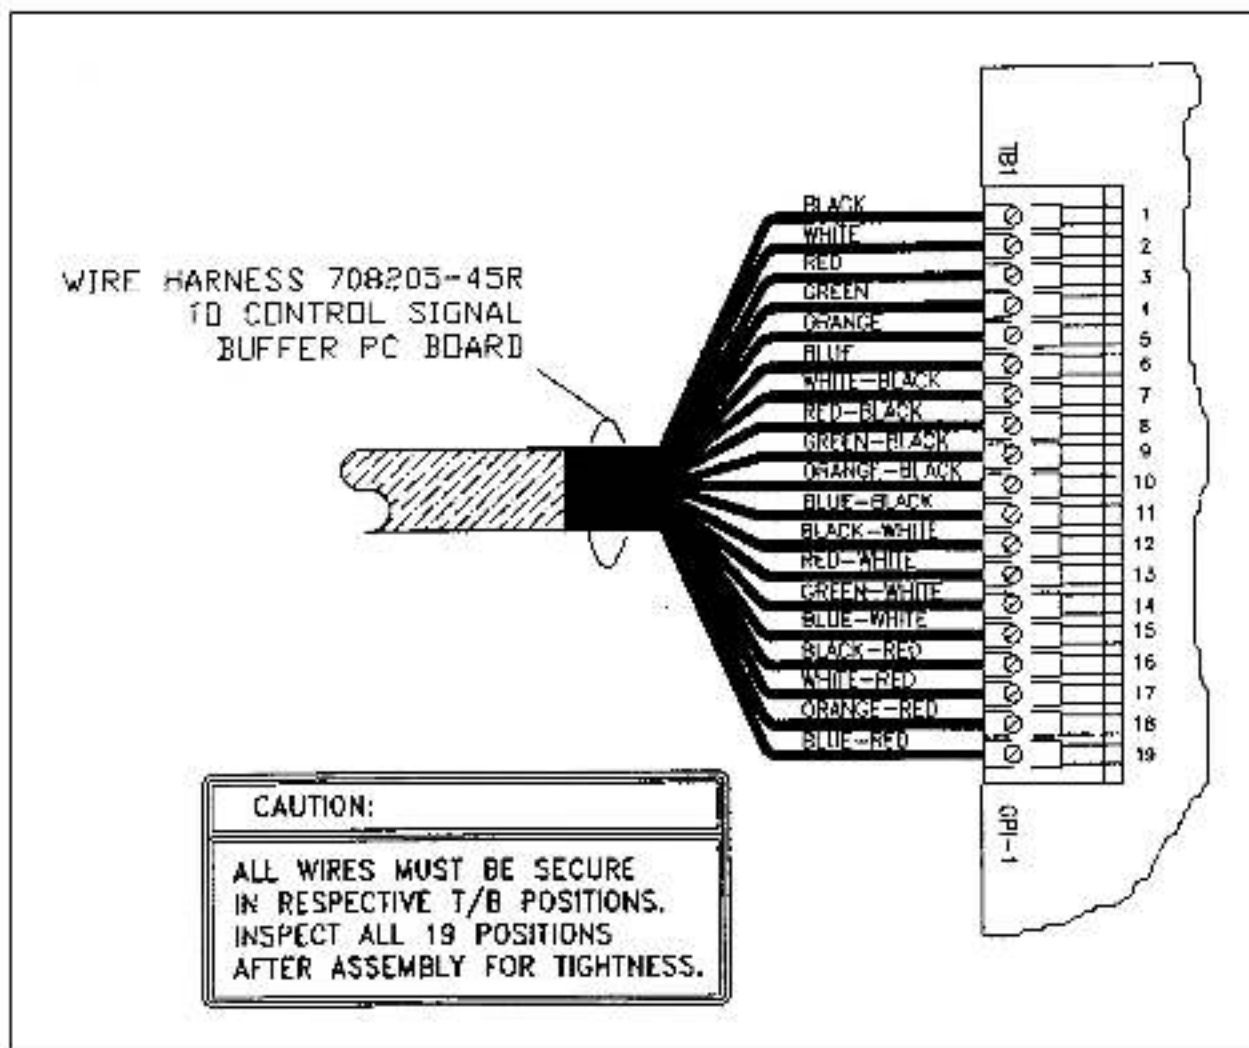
Control Signal Buffer PC Board to Regulator Board Wiring Locations.
